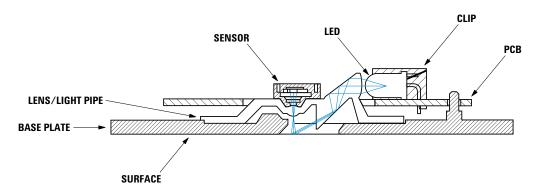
Sectional view of PCB assembly highlighting optical mouse components.
